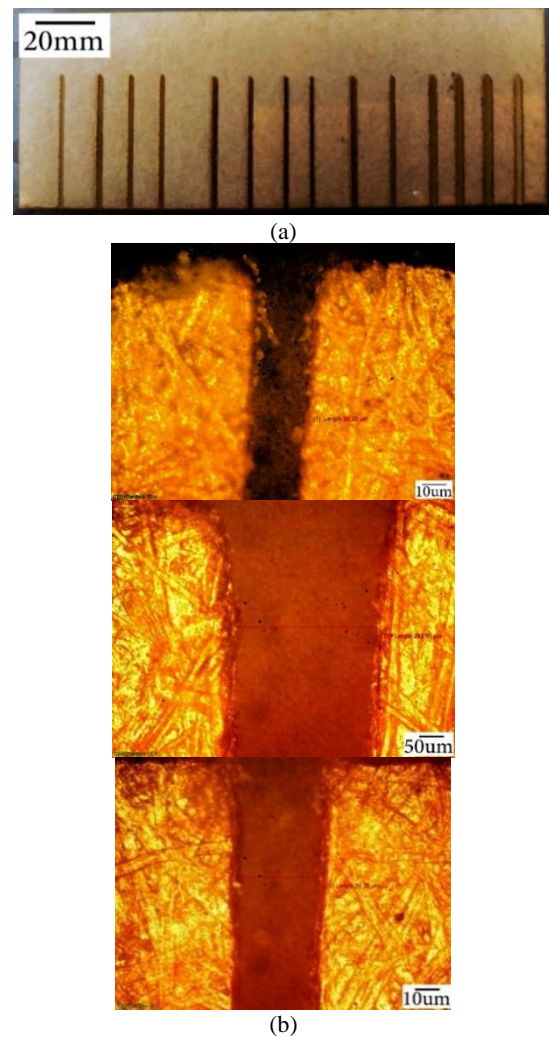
The laser cutting of PMMA sheet a) top view b) side view (observed by OM)
